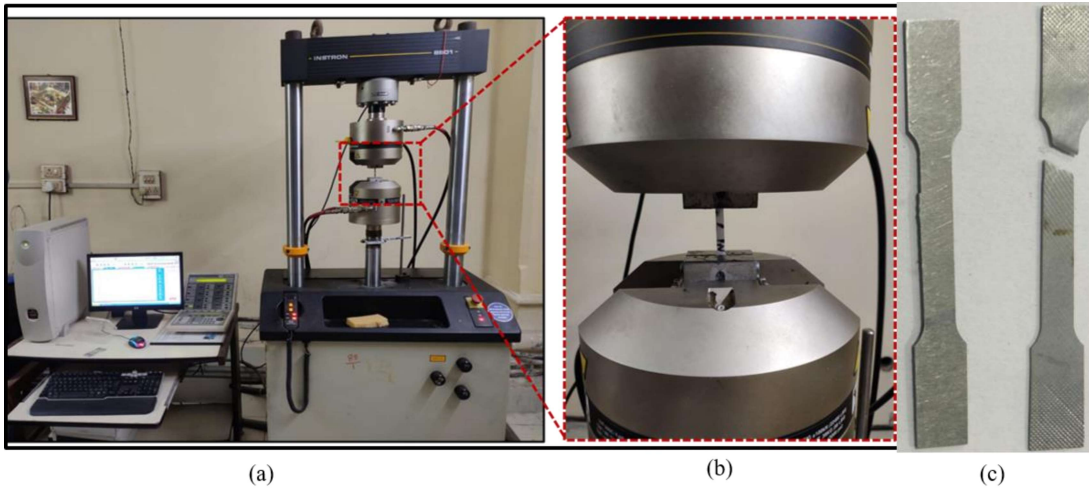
(a) UTM setup for tensile testing with mounted sample, (b) sample for tensile test marked on the cone for cutting, (c) fractured tensile tested samples.
